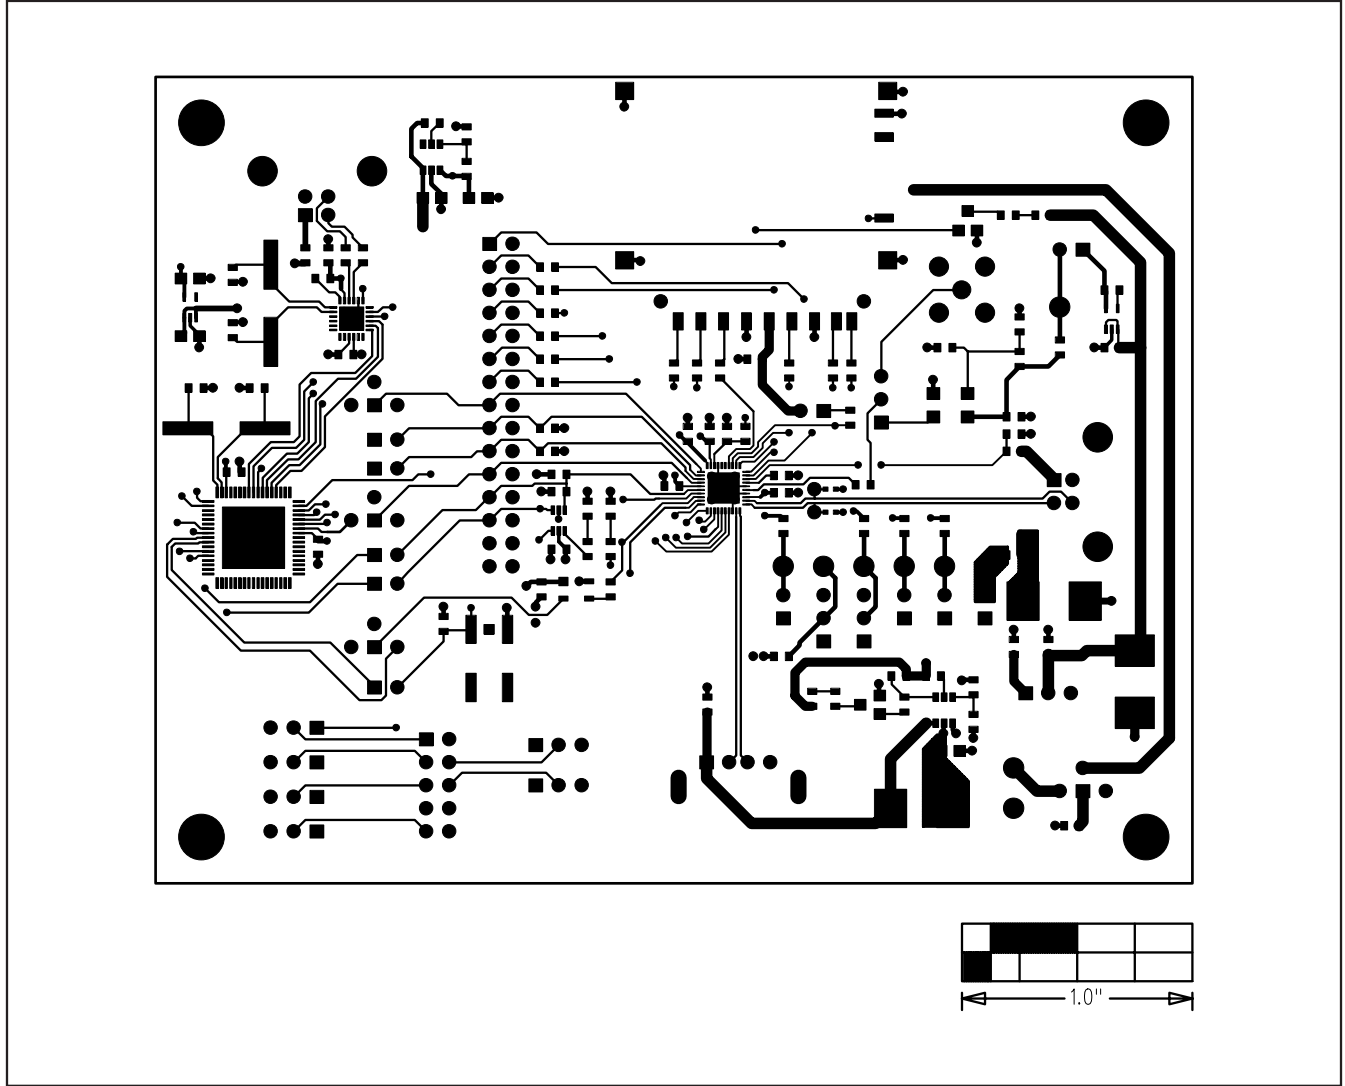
MAX14502 EV Kit PCB Layout—Component Side
